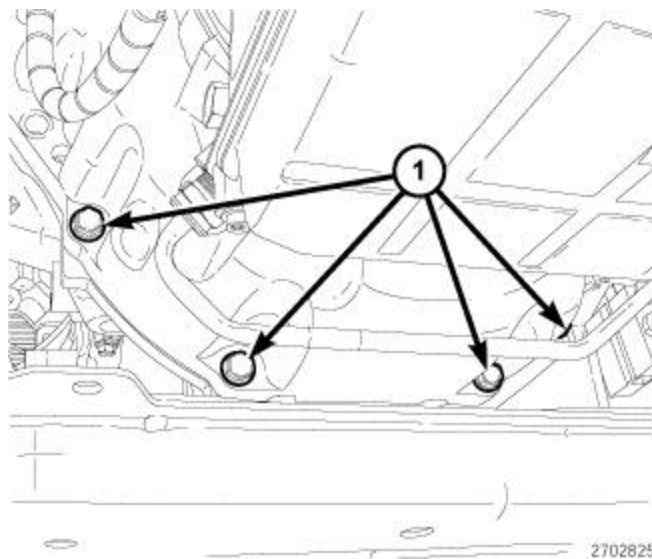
Transmission-To-Engine Oil Pan Bolts
